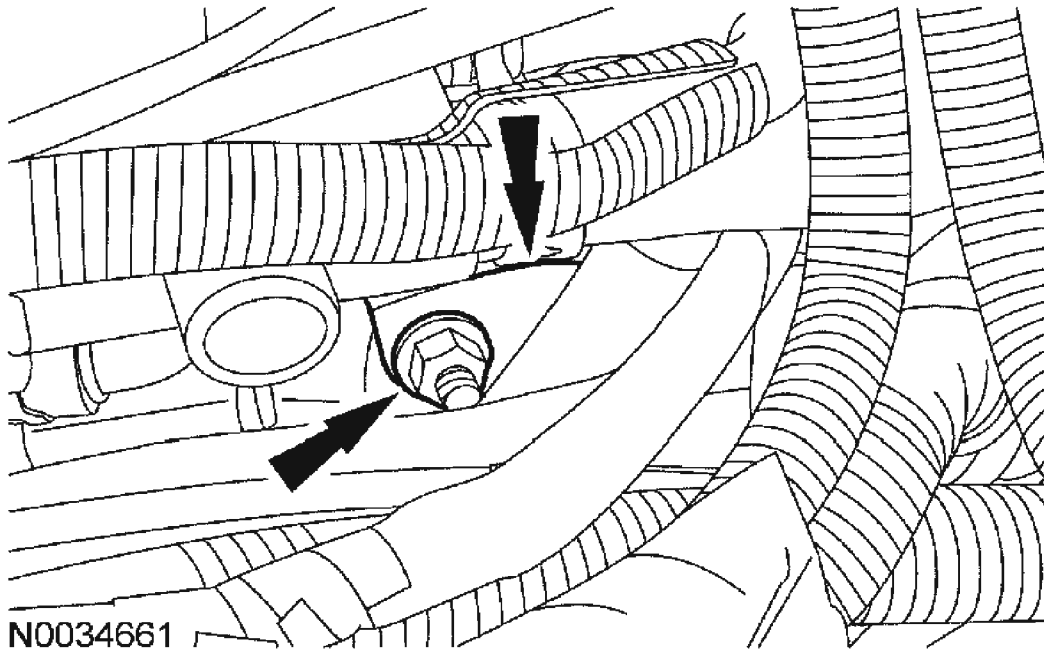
Positioning Electrical Connector Bracket Aside Nuts
